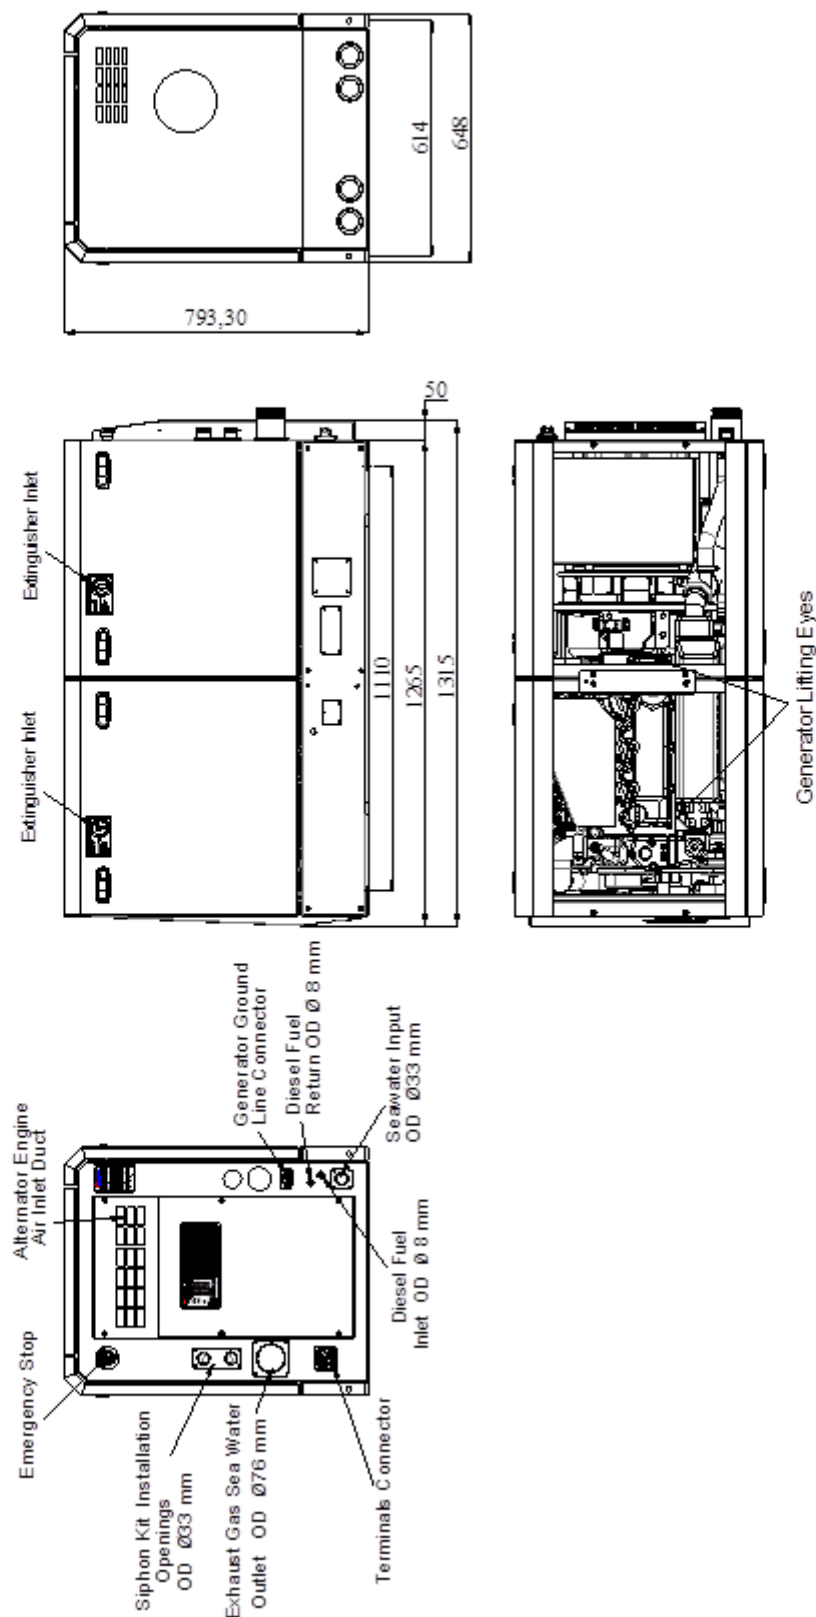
GENERATOR SET DIMENSIONS - MG 318, TG 323
